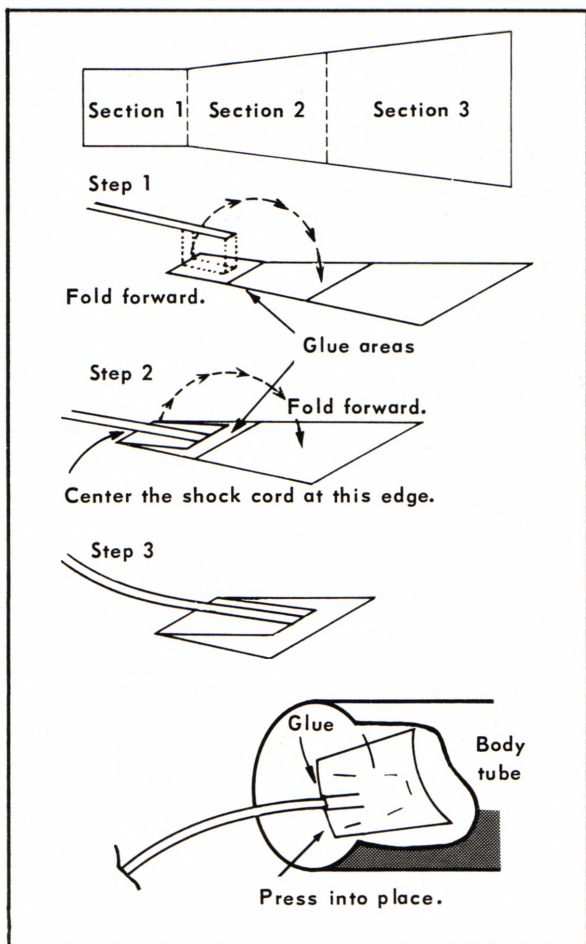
Second method of mounting the shock cord. First, trace the pattern on typing paper and cut it out. Then follow steps 1 through 3.
